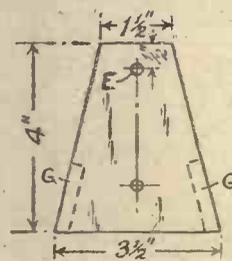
The measurements of the side pieces, C, C (Fig. 98).
